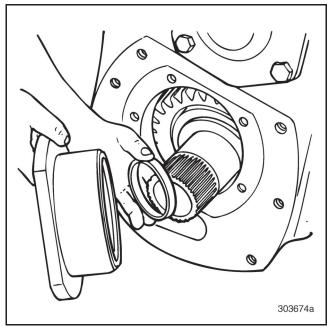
Installing Spacer, Bearing Housing and Bearing Cone
